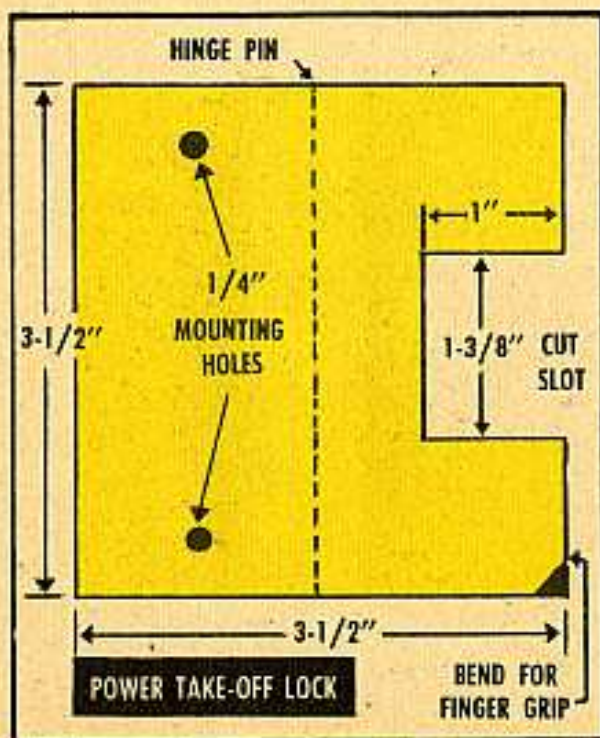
Takes a hinge cut and drilled like this to keep that PTO lever in its place.
